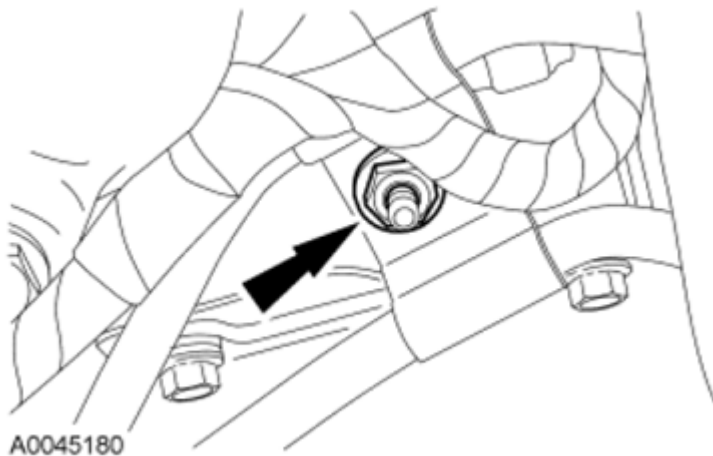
Locating Power Steering Pressure (PSP) Switch Electrical Connector
